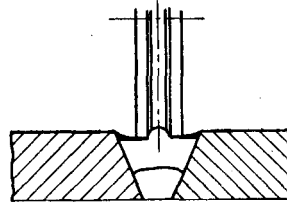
GAS-HEATED HOT AIR WELDING EQUIPMENT
